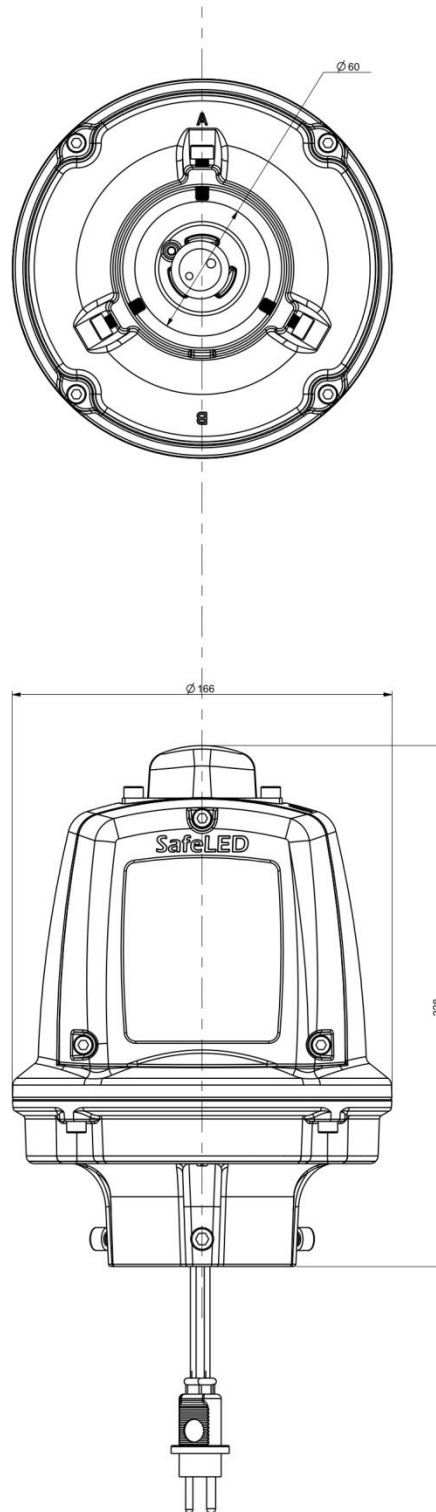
LIGHT FIXTURE DIMENSIONS FOR CIRCULAR GUIDANCE
